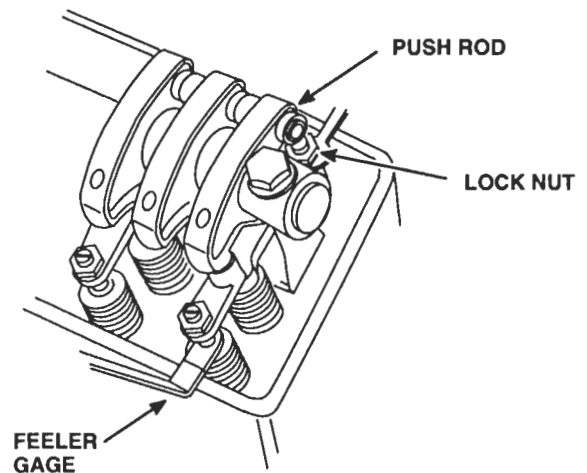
Adjusting Valve Clearance (Spring-Loaded Valve Bridge)
